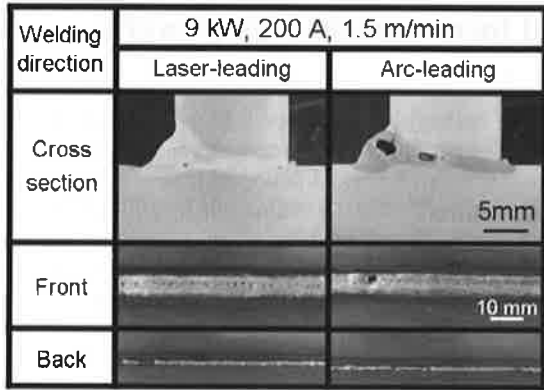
Appearance and cross-section of hybrid weld bead of SS400 at different welding directions
